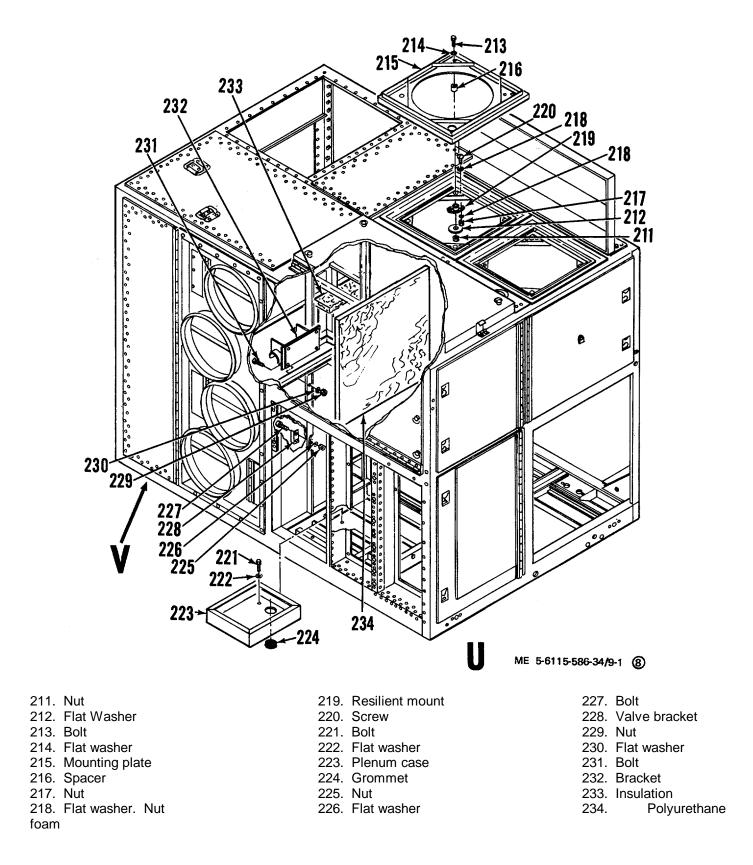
Enclosure assembly, exploded view. (sheet 8 of 10)
